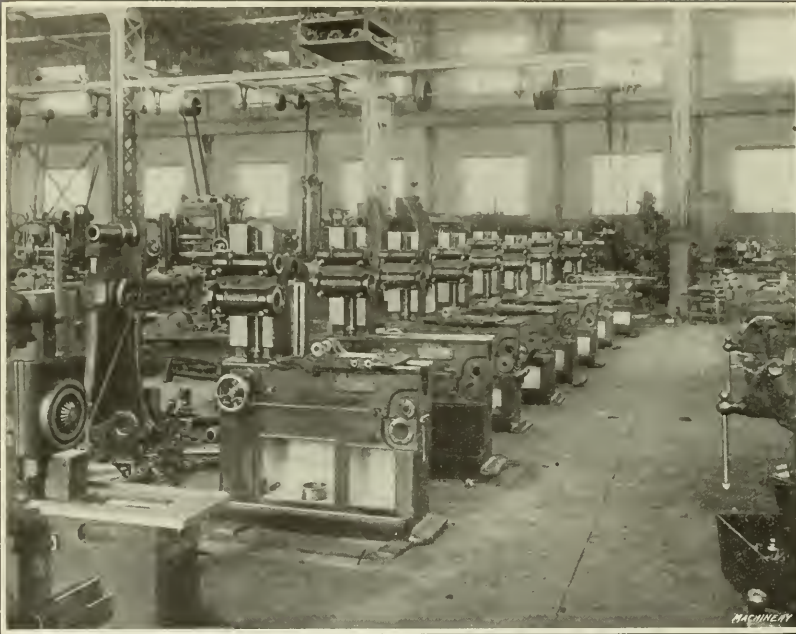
Line of Brown & Sharpe No. 13 Gear-cutting Machines in Process of re-manufacturing
